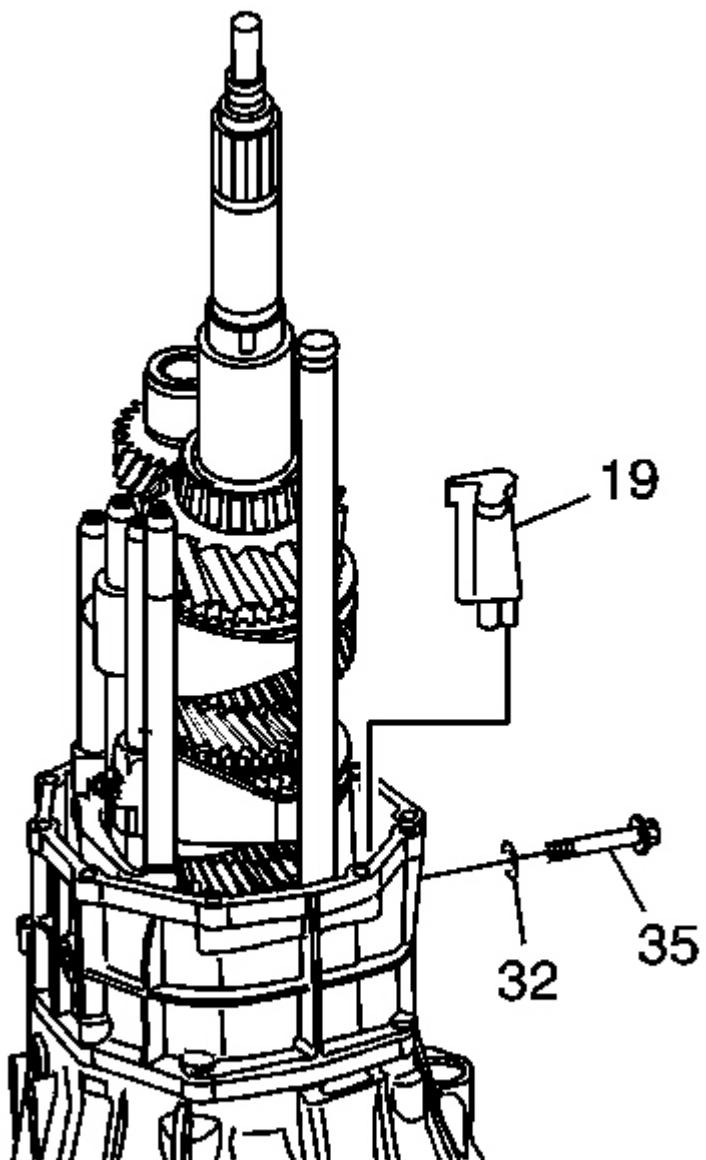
Identifying Oil Trough Pipe, Reverse Idler Gear Shaft Bolt & Gasket
